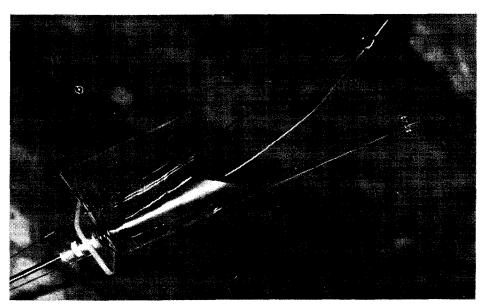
Construction of the coaxial to open-wire flare shown in Fig. 5.
